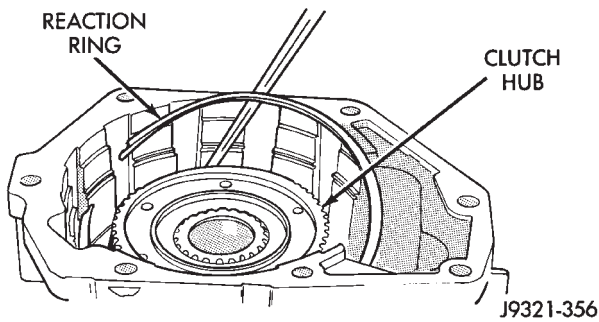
Overdrive Clutch Reaction Snap Ring Removal/Installation
